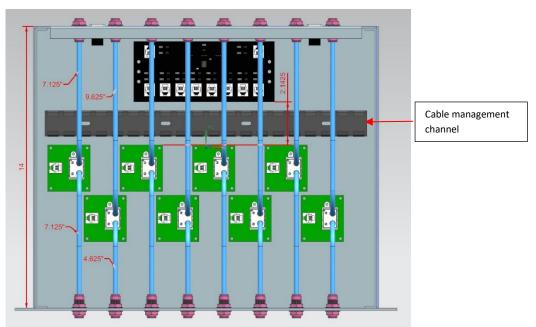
Gas Flow Sensor chassis final design with cable management channel
